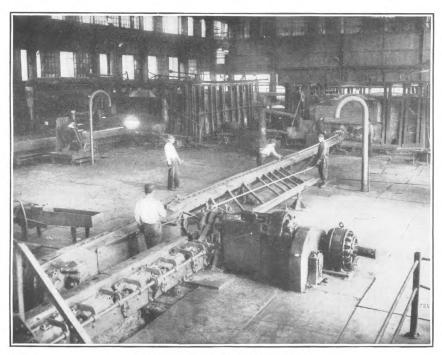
BUTT-WELD TUBE MILL.
